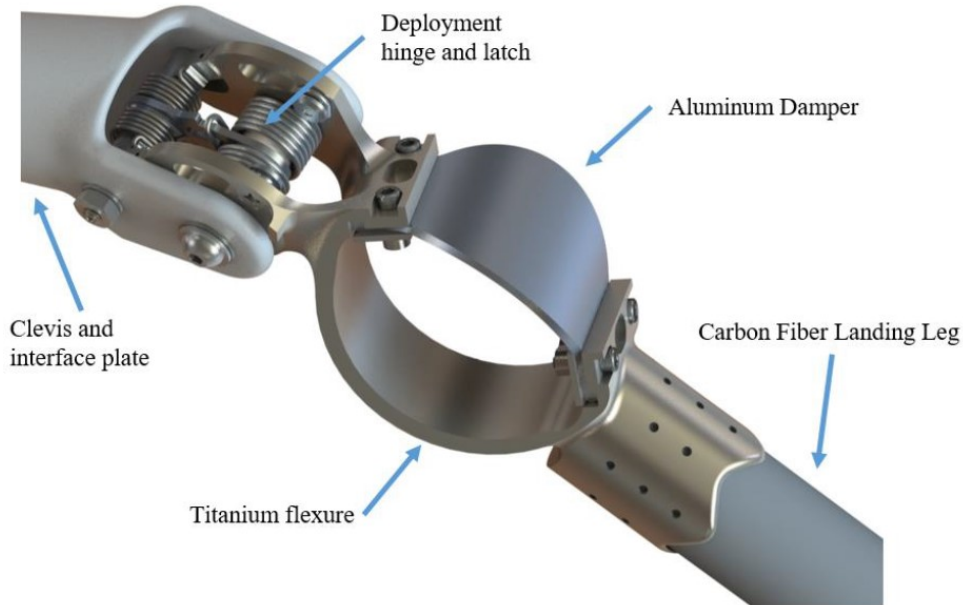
Landing gear deployment hinge and flexure/damper mechanism
